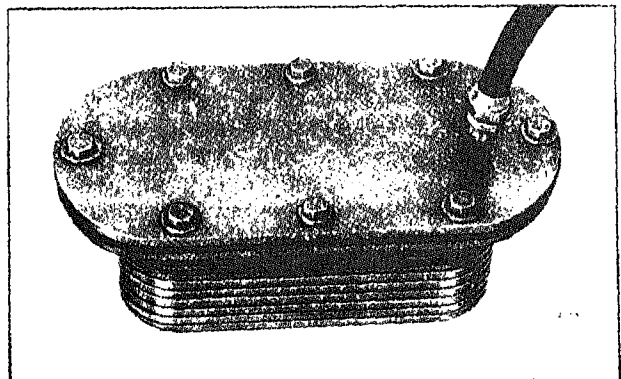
Preparing Oil Cooler Core for Pressure Test
